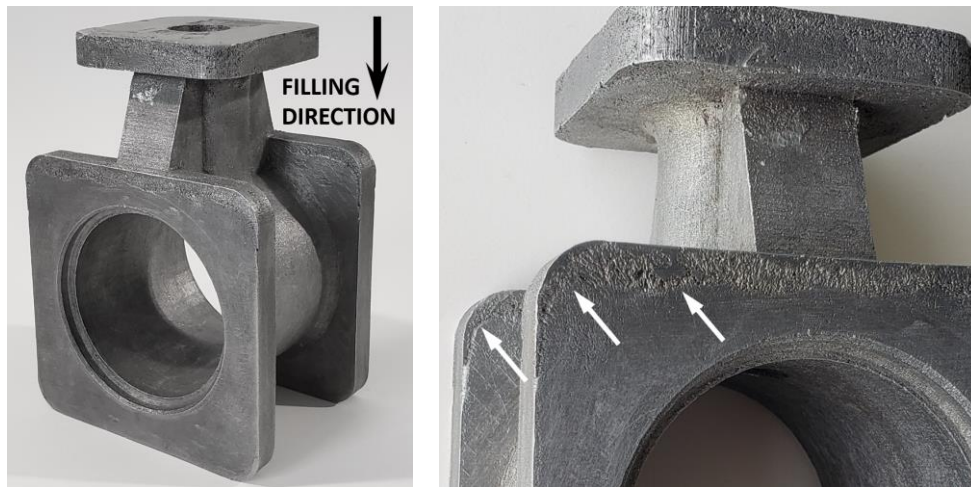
Valve body casting showing fold defects from PLA residues after filling and solidification. White arrows indicating edge of the fold defect.
